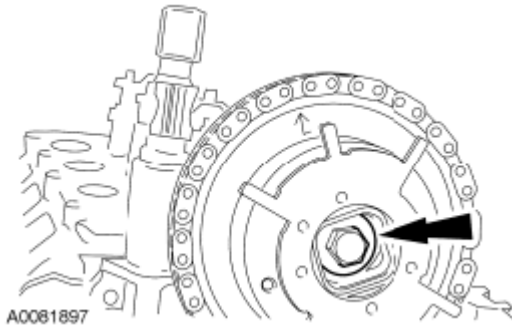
Locating Camshaft Phaser And Sprocket Assembly Bolt
